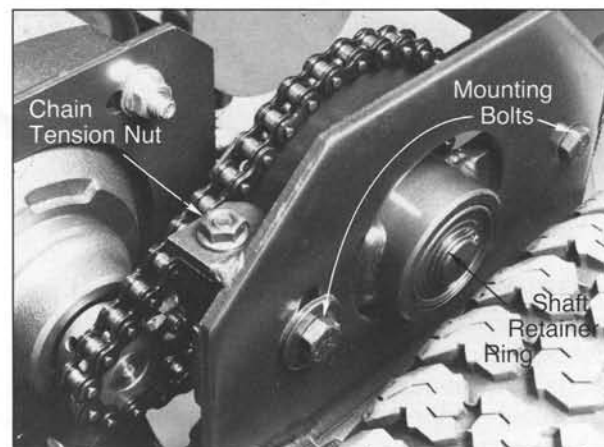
Compound Sprocket/Jackshaft Assembly
